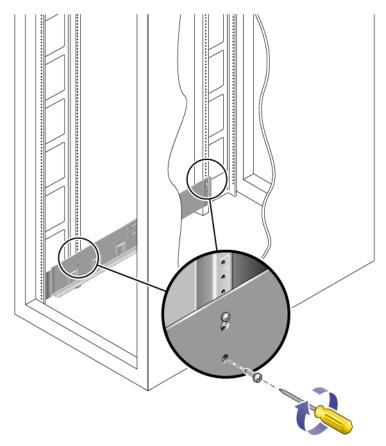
Inserting Screws in the Lower Side Mounting Holes of the Cabinet
